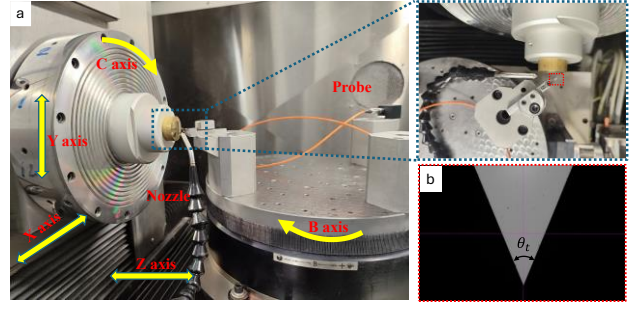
Ultra-precision machining of re-entrant structured surface. (a) machining set-up for the diamond tool and (b) the sharp edge single-point diamond cutting tool used in the machining under tool-setter.
